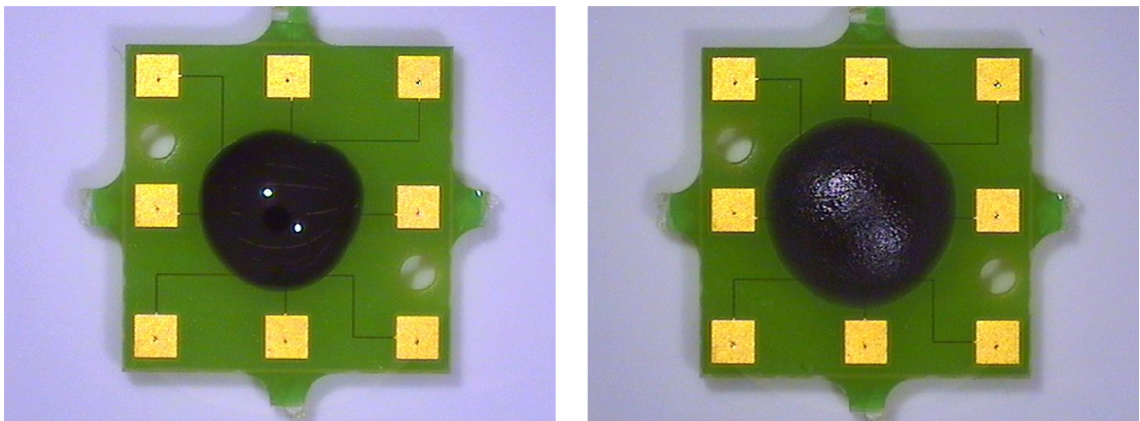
Encapsulant on assembly before (left) and after (right) cure
